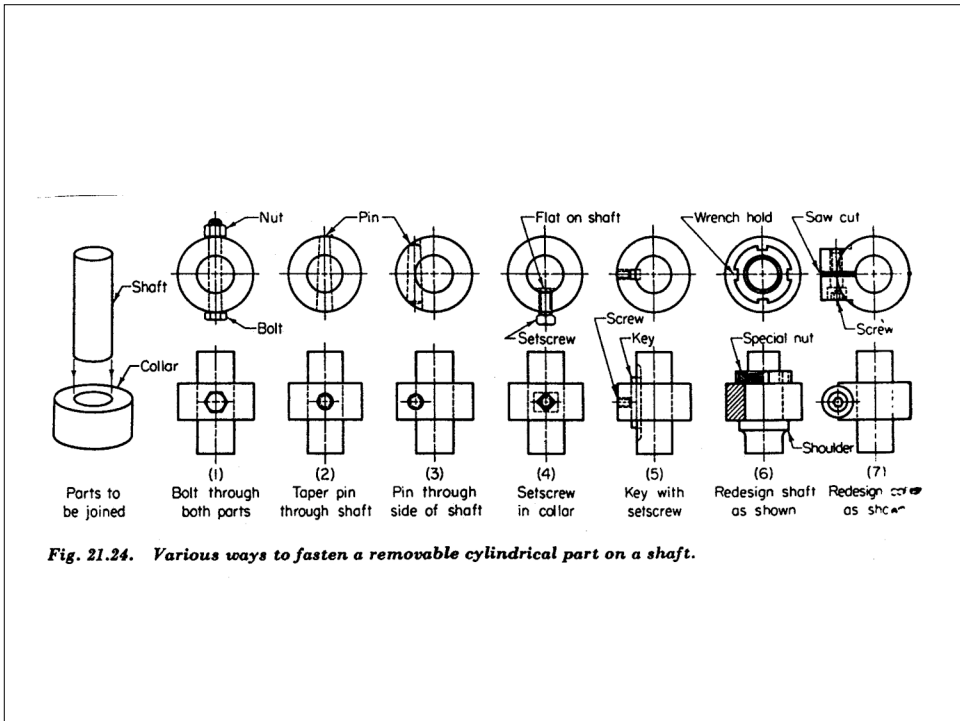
Various ways to fasten a removable cylindrical part on a shaft.
